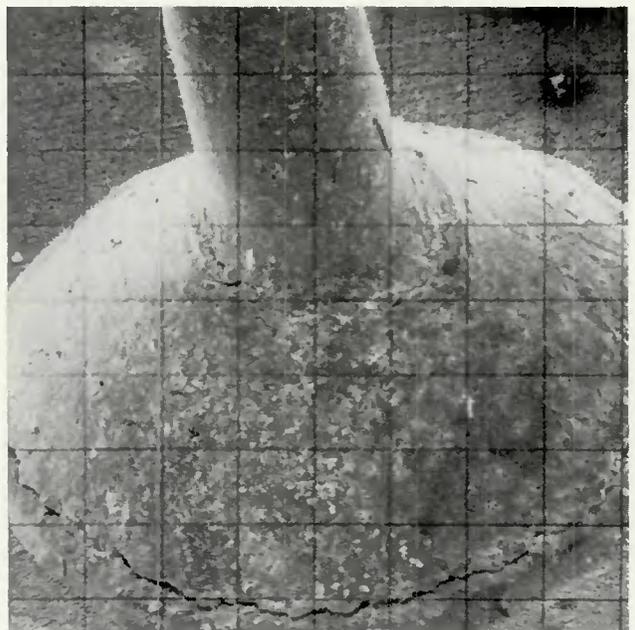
SEM photomicrograph of a typical Sn63 solder joint after exposure to 500 thermal fatigue cycles. Note that lead wire fillet edge solder cracking and pad-to-solder alloy separation has occurred.  $\times 50$
